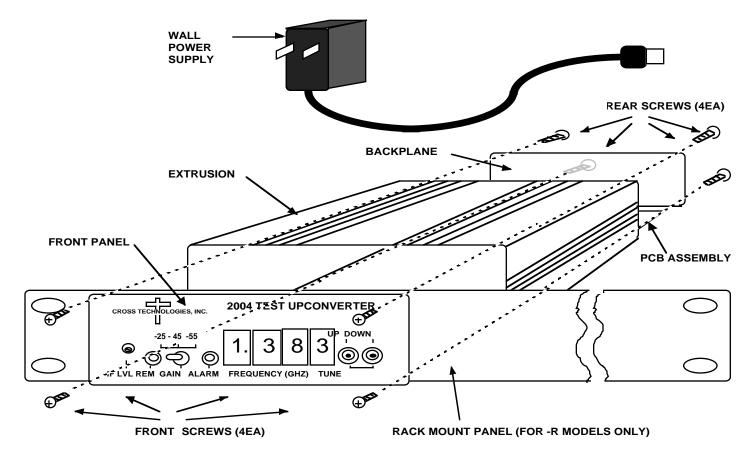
SERIES 2000 ASSEMBLY DRAWING
